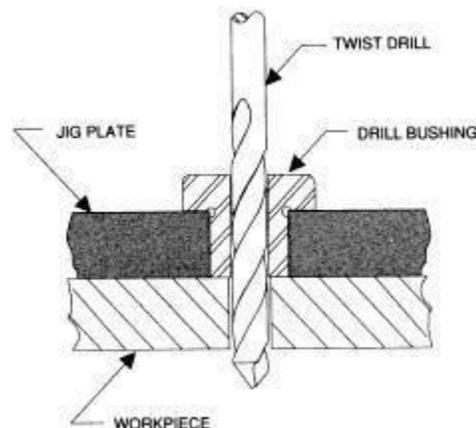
A Jig guides the cutting tool, in this case with a bushing
